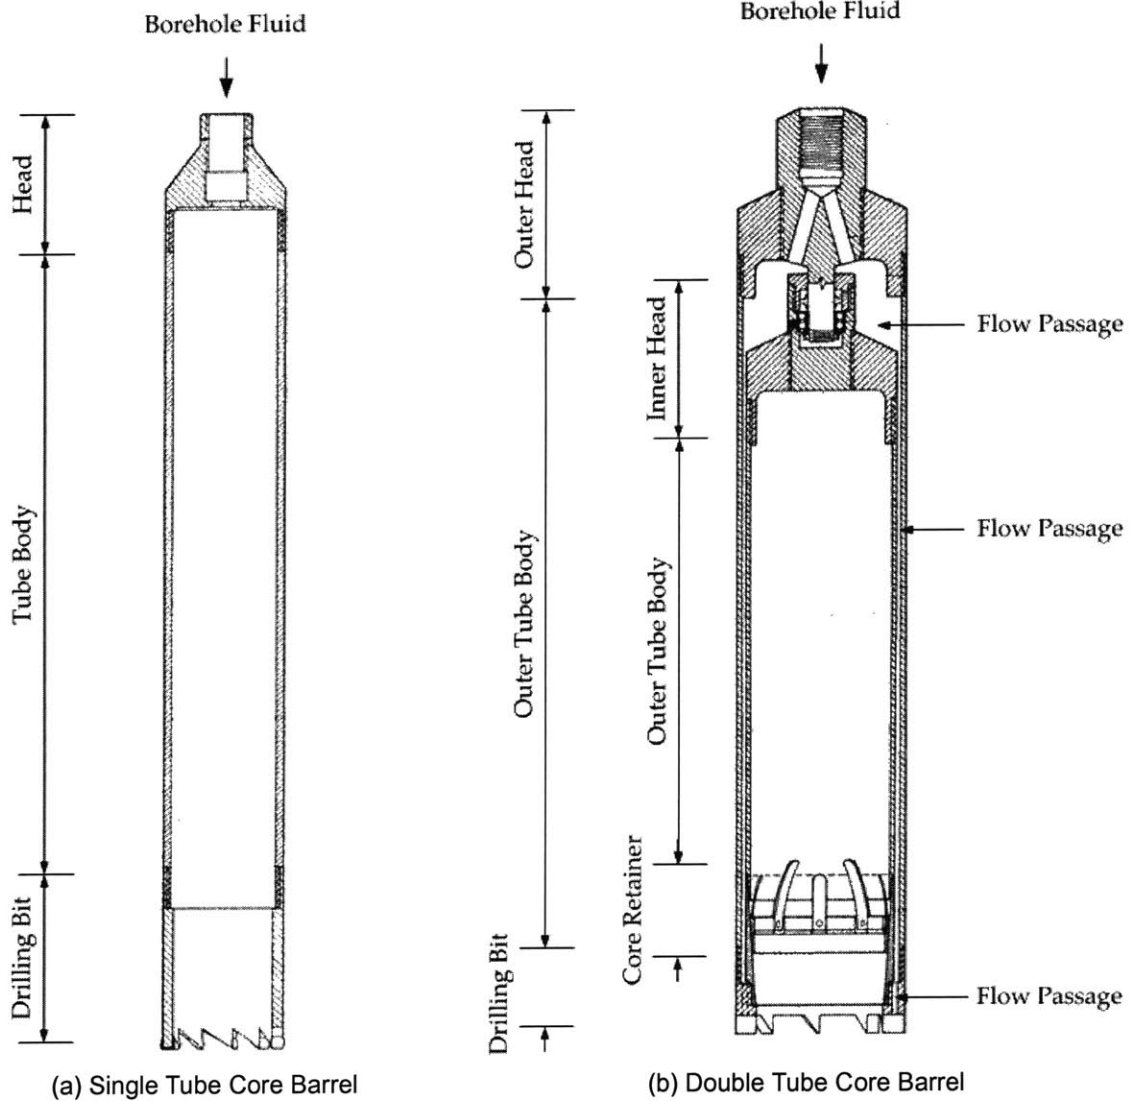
Single & Double Tube Core Barrel (Hvorslev, 1949)
